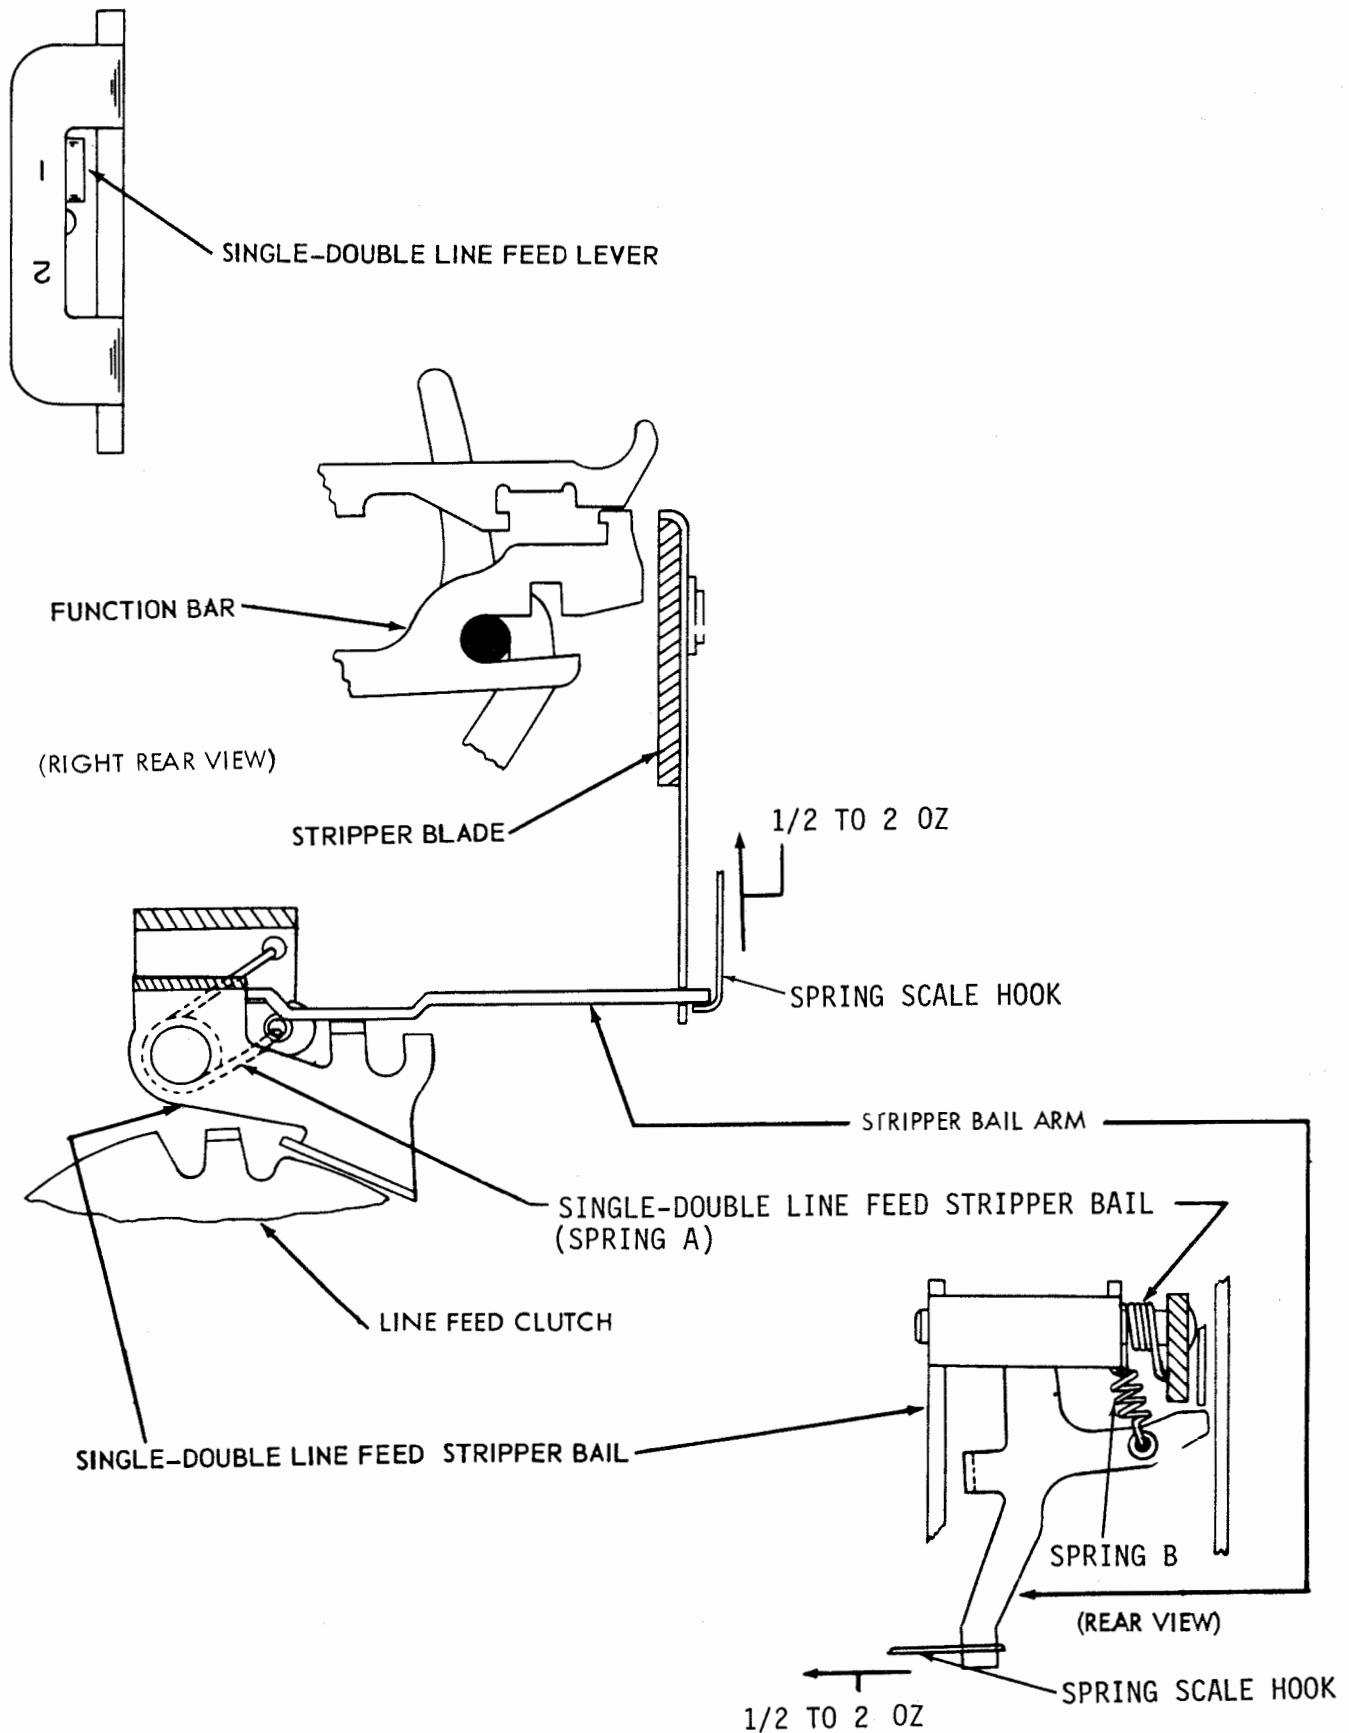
Single-Double Line Feed Stripper Bail Assembly Springs
